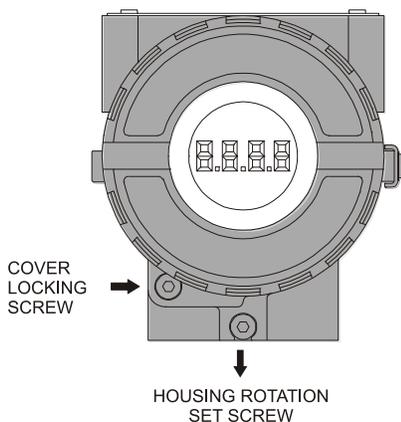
Cover Locking and Housing Rotation Set Screw
